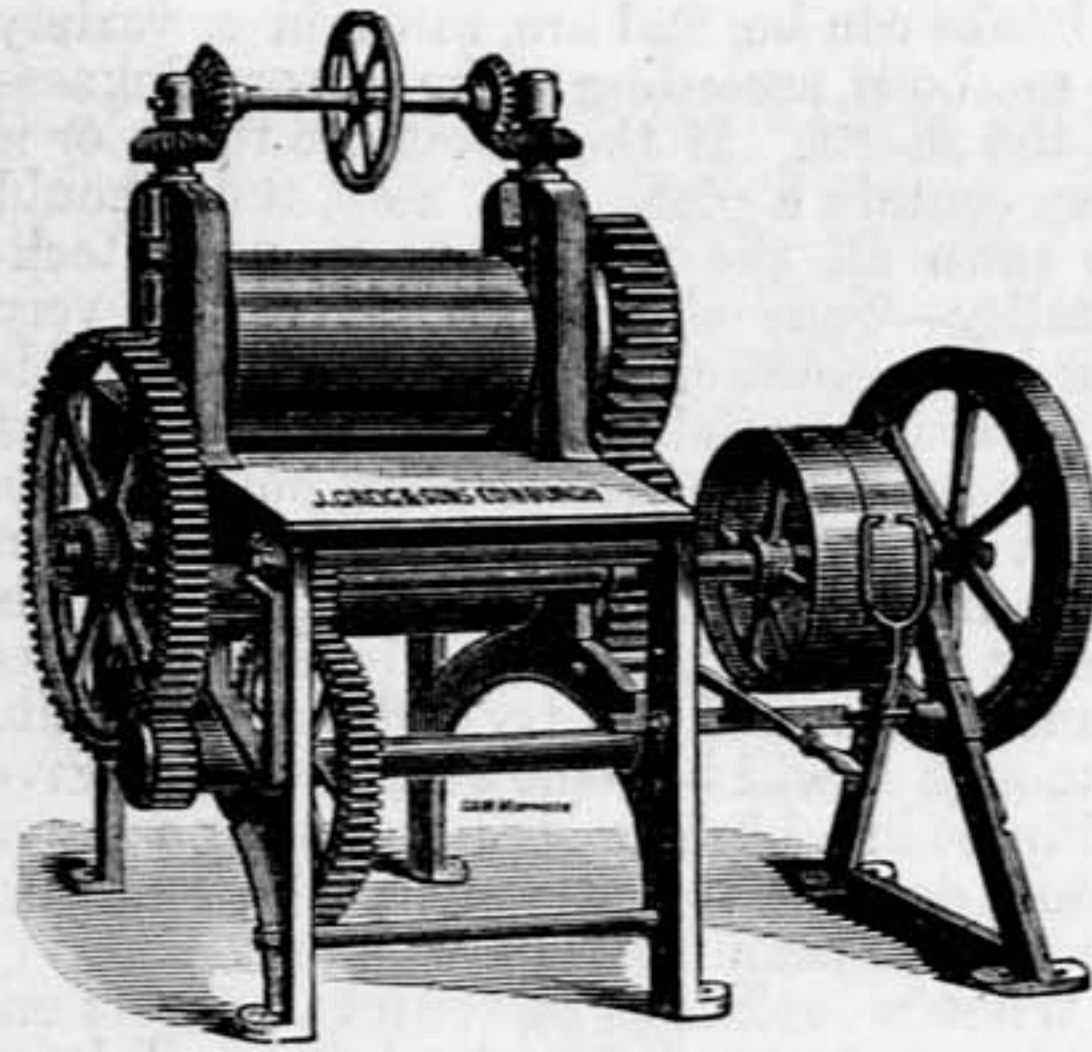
Greig's Bookbinders' Rolling Machine.
